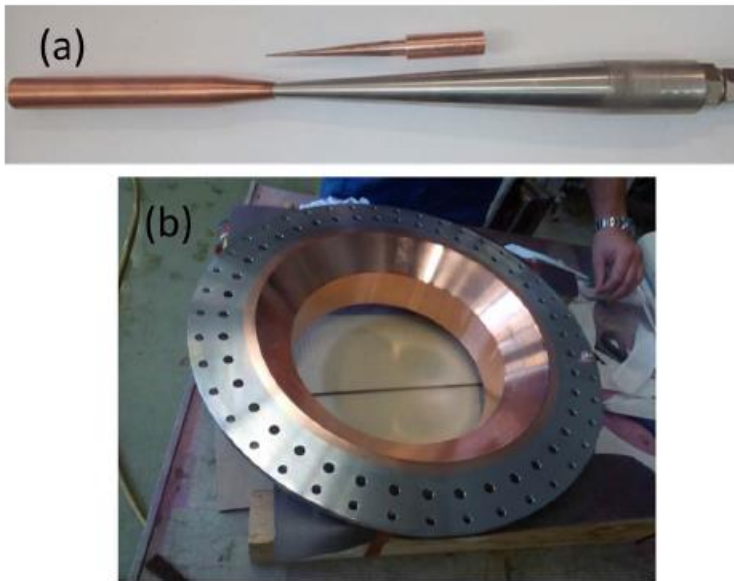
a) Tip produced by electro-erosion. The figure shows one of the molds used during the manufacturing process. b) Flange produced by electrodeposition.
